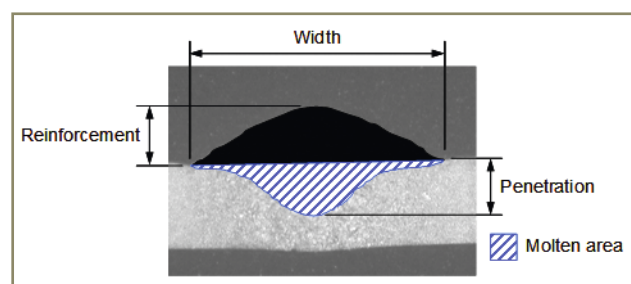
Weld bead geometrical parameters measured for evaluation of the laser – tandem GMAW process
